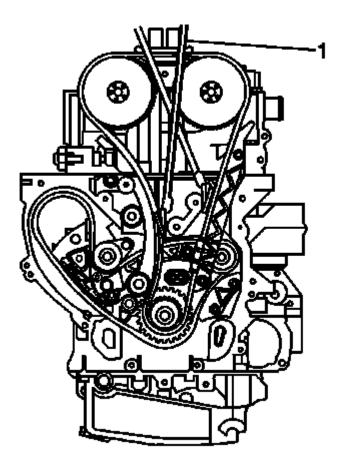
Timing Chain Guide Access Hole Plug & Washer Courtesy of GENERAL MOTORS COMPANY
